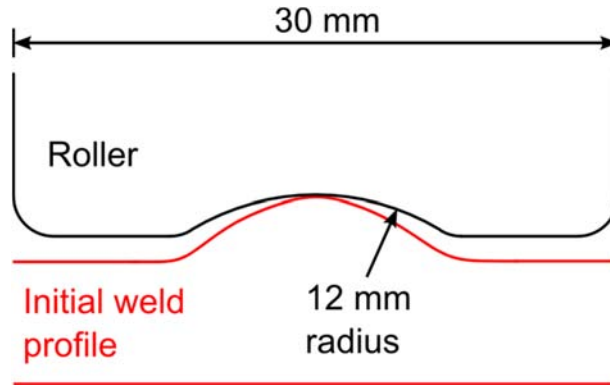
Contoured roller to accommodate a weld seam. The initial weld profile is taken from laser coordinate measurements of an un-rolled weld.
